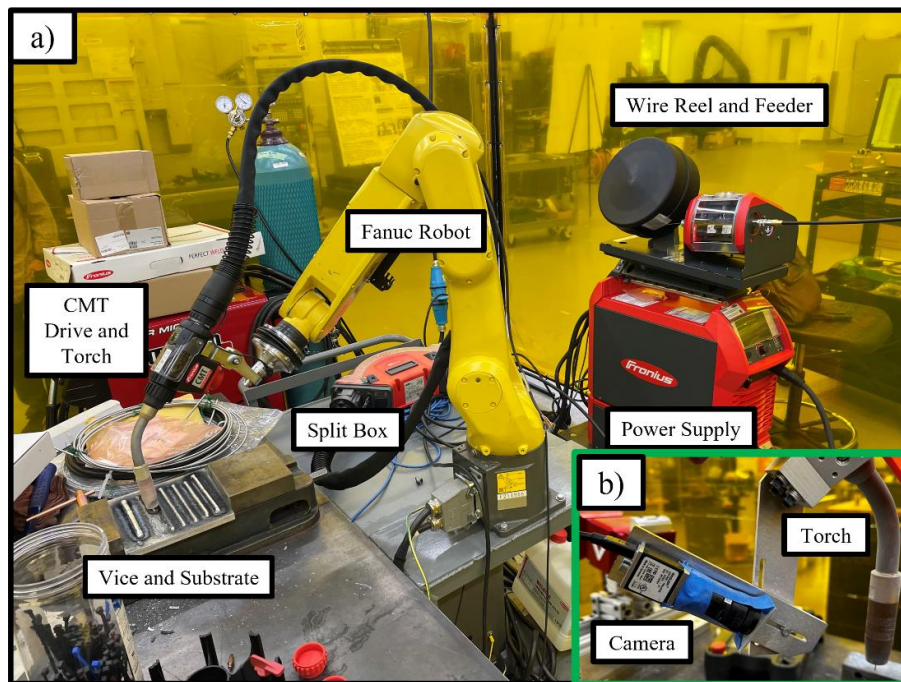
a) WAAM CMT cell; b) optical camera mounting location
